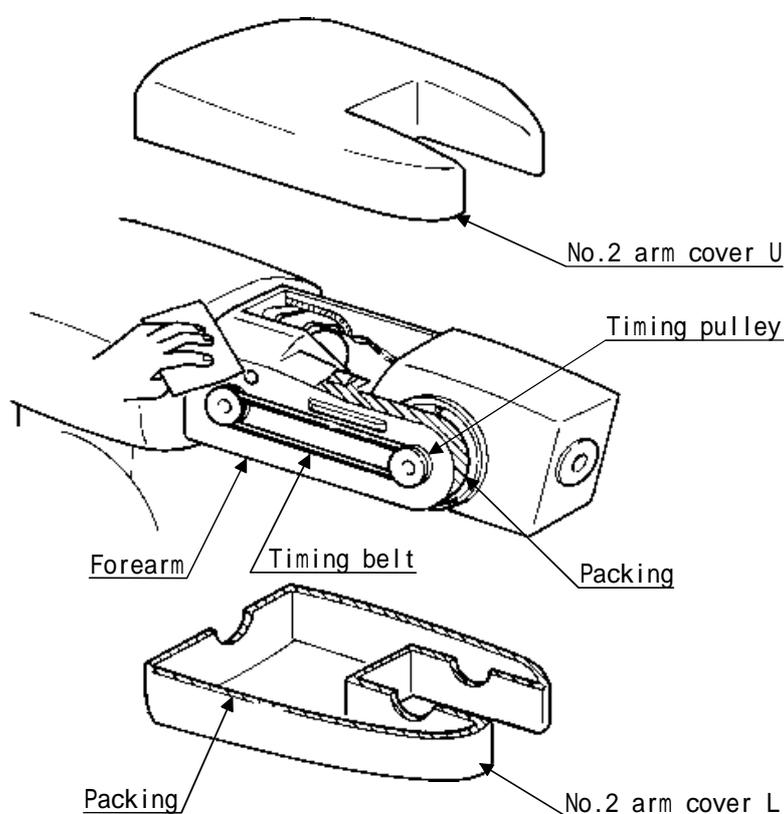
No.2 arm cover cleaning methods of clean specification
